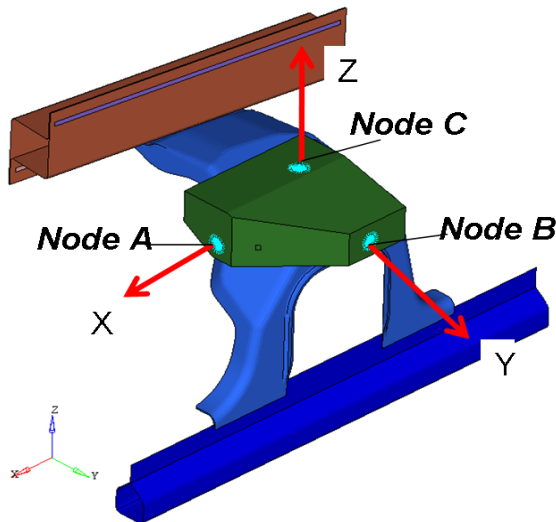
Coordinate axes and layout arrangement for demonstration structure mechanical testing.
